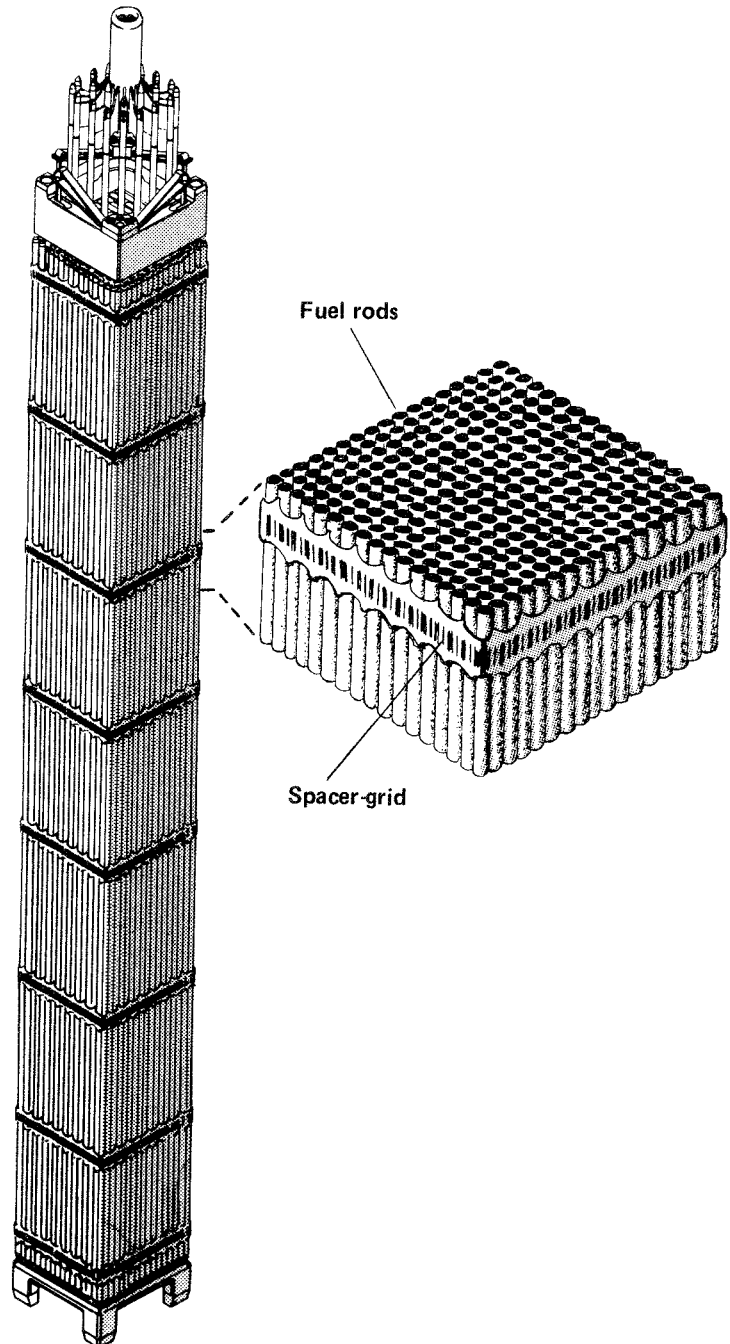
Fuel assembly for a pressurized water reactor (PWR).
